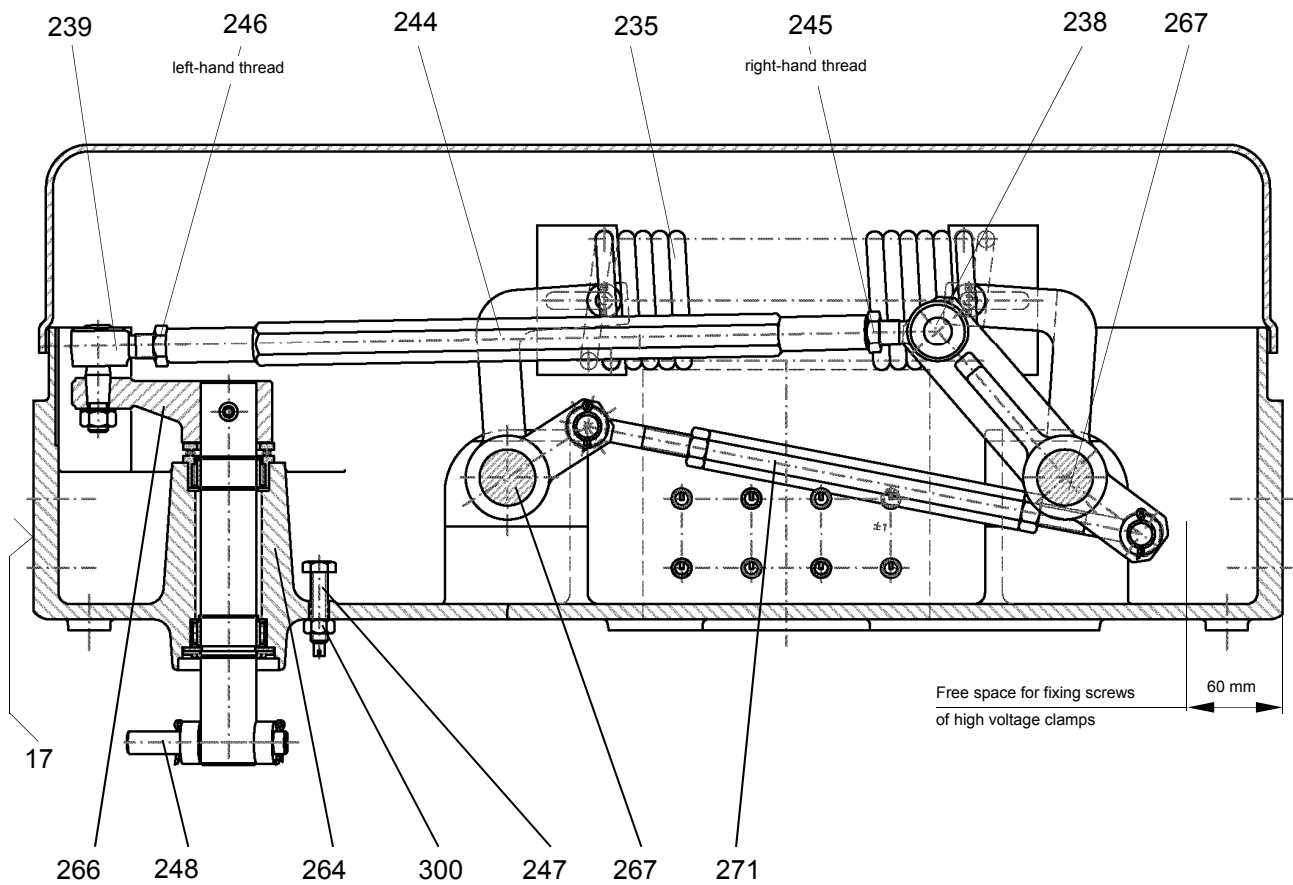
Gear box 224, sectional drawing: side view (switching position CLOSED)
